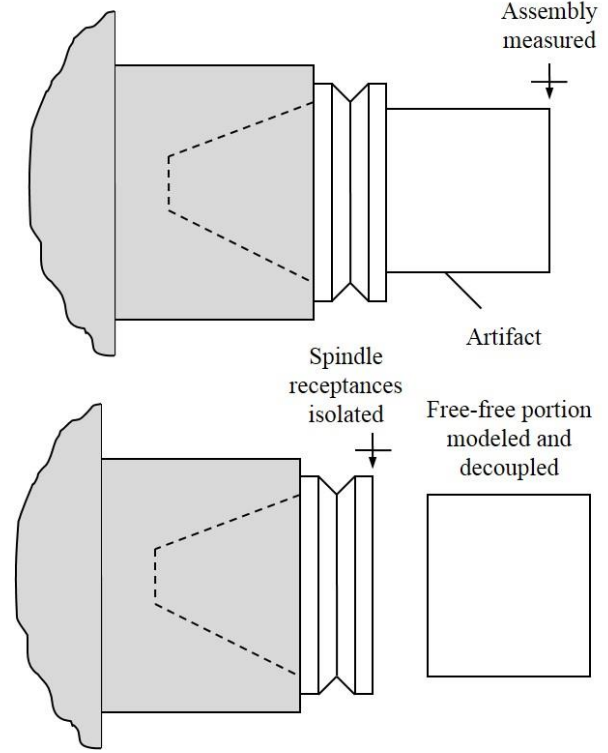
Machine-spindle receptances are determined using inverse RCSA.
